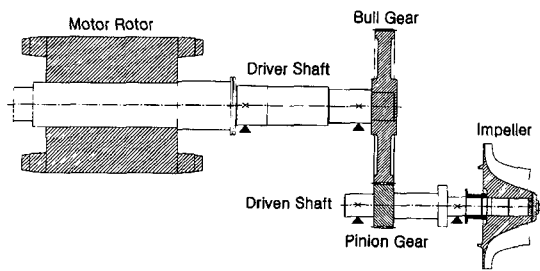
Schematic of a 800 RT turbo-chiller rotor-bearing system
